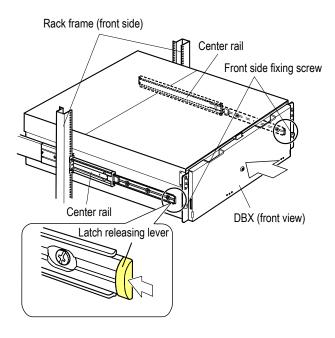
Fixing the Front Side of the Array (DBX)
